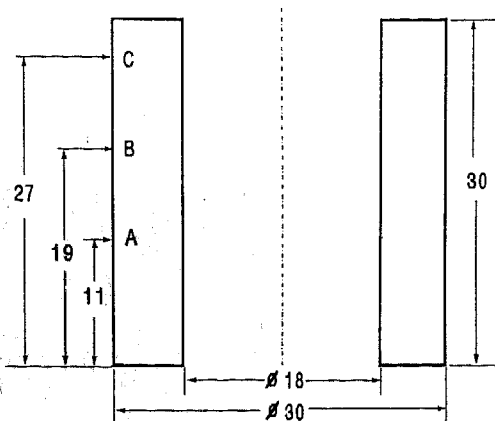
Cylindrical type thermal distortion specimen. All dimensions in millimeters.
